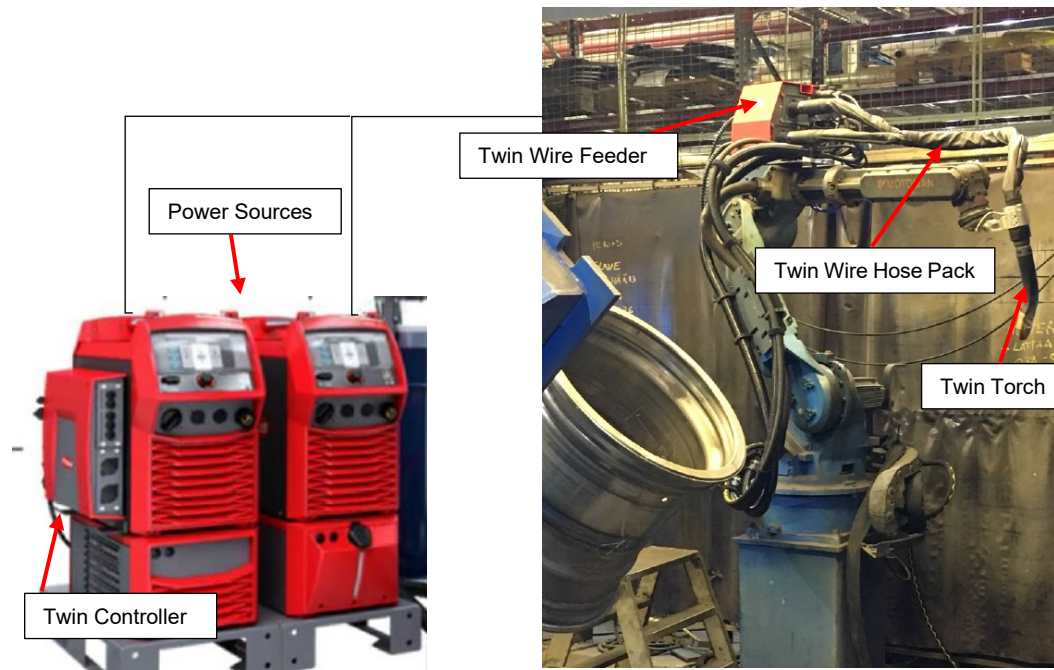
Industrial setup of TPS/I TWIN Push for welding Harvester rims [13]
